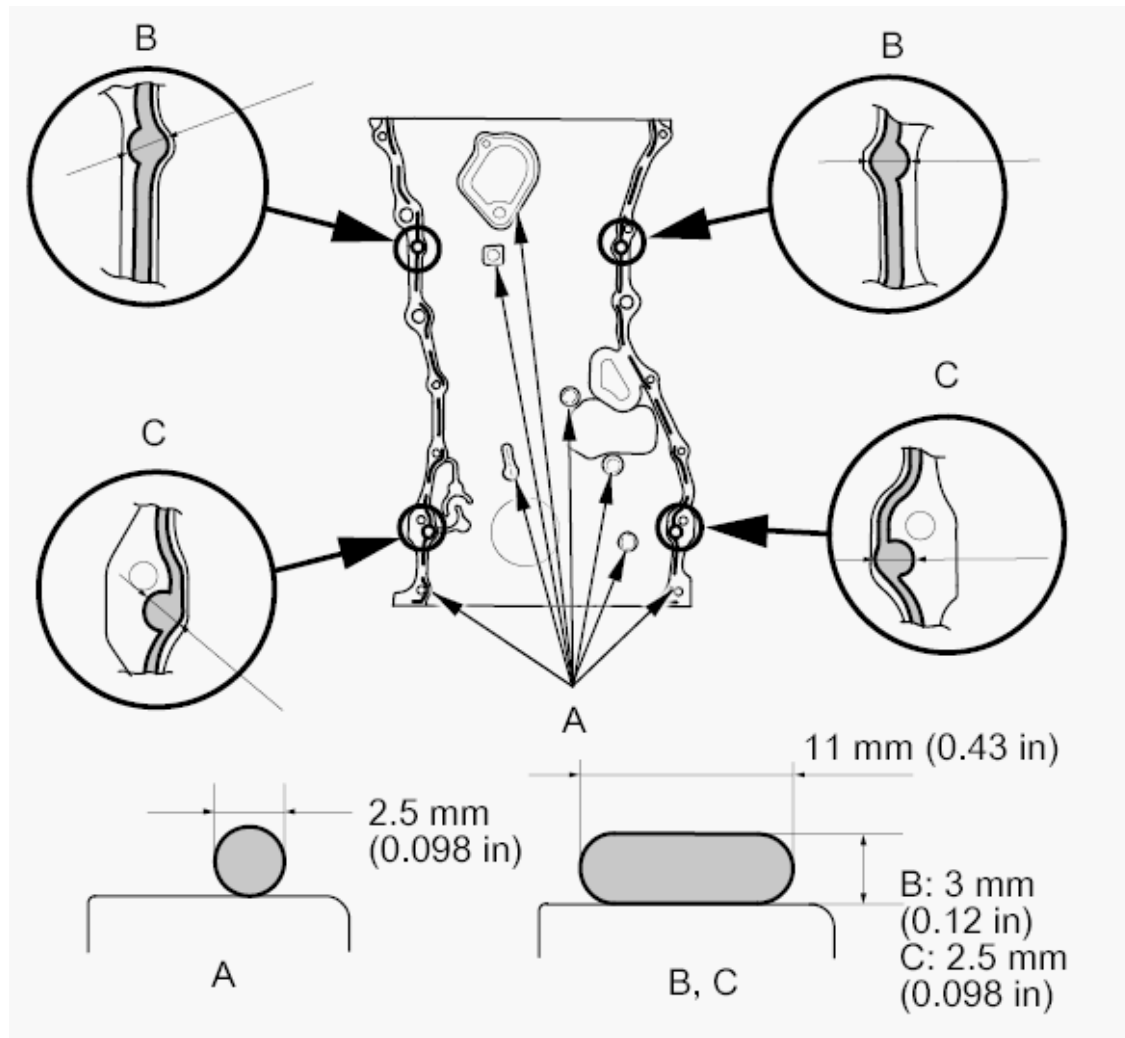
Identifying Engine Block Upper Surface Contact Areas And Chain Case
